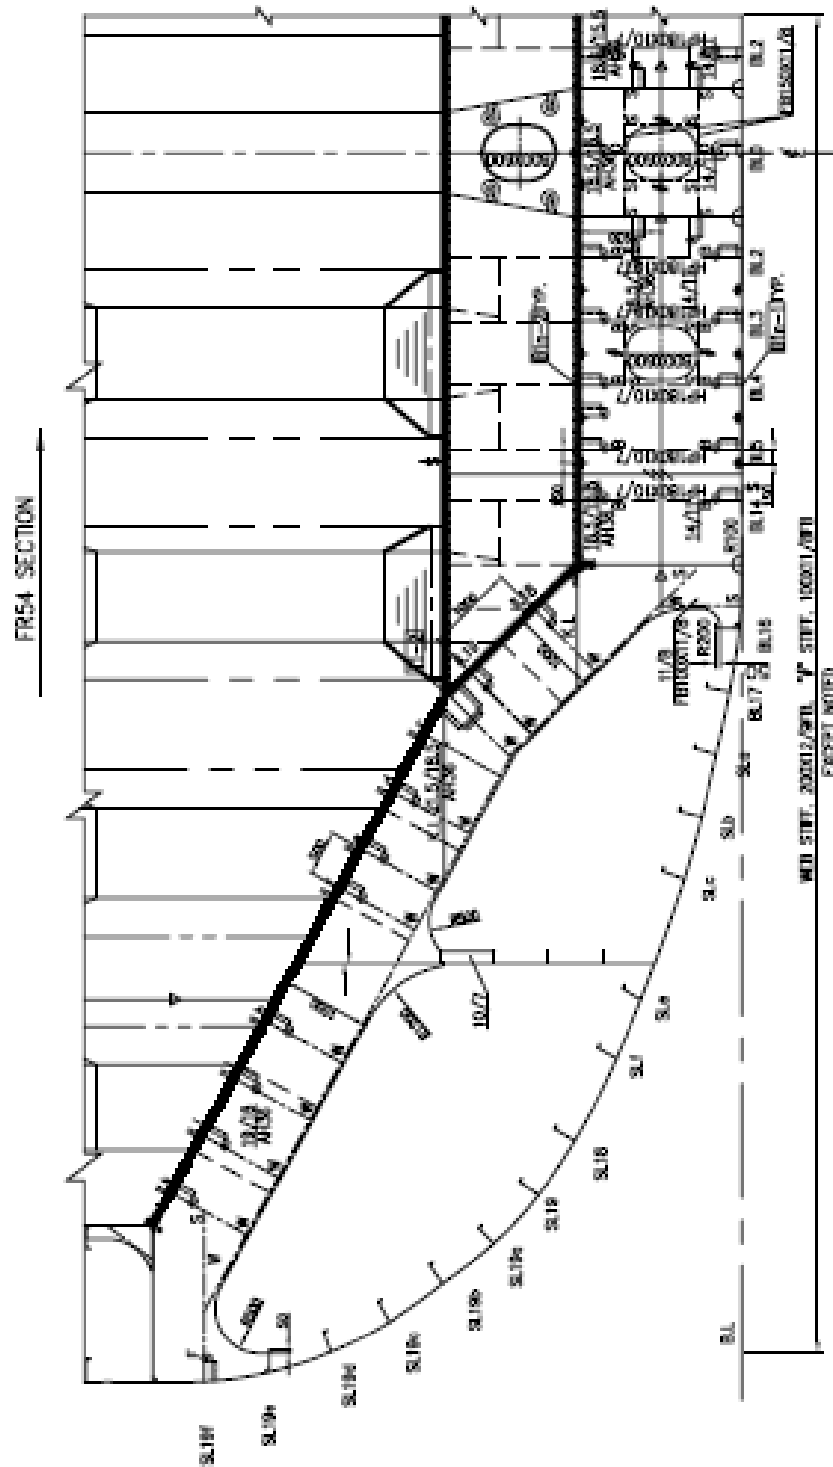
(c) – Double bottom construction fr.54, transverse view
